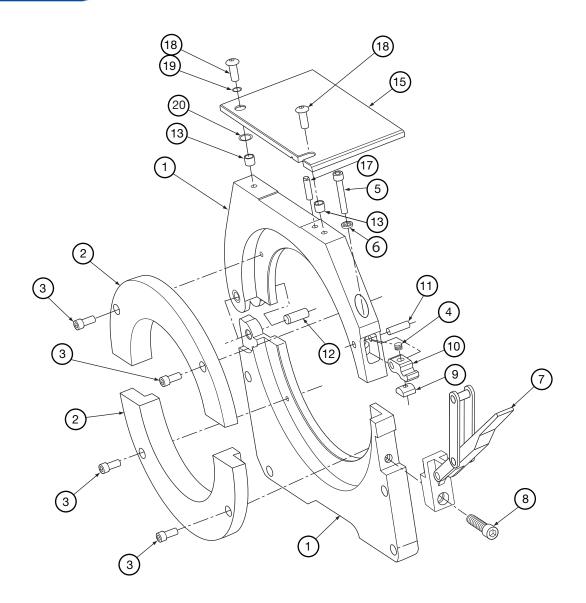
SWS-40H Fixture Side Plate Assembly – Left
